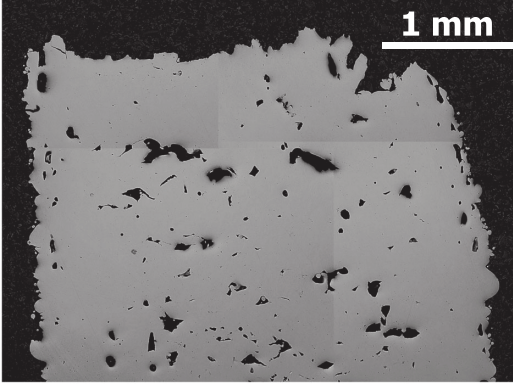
Polished cross section of specimen subjected to fatigue. The corresponding fracture surface is shown in Fig. 5f.
